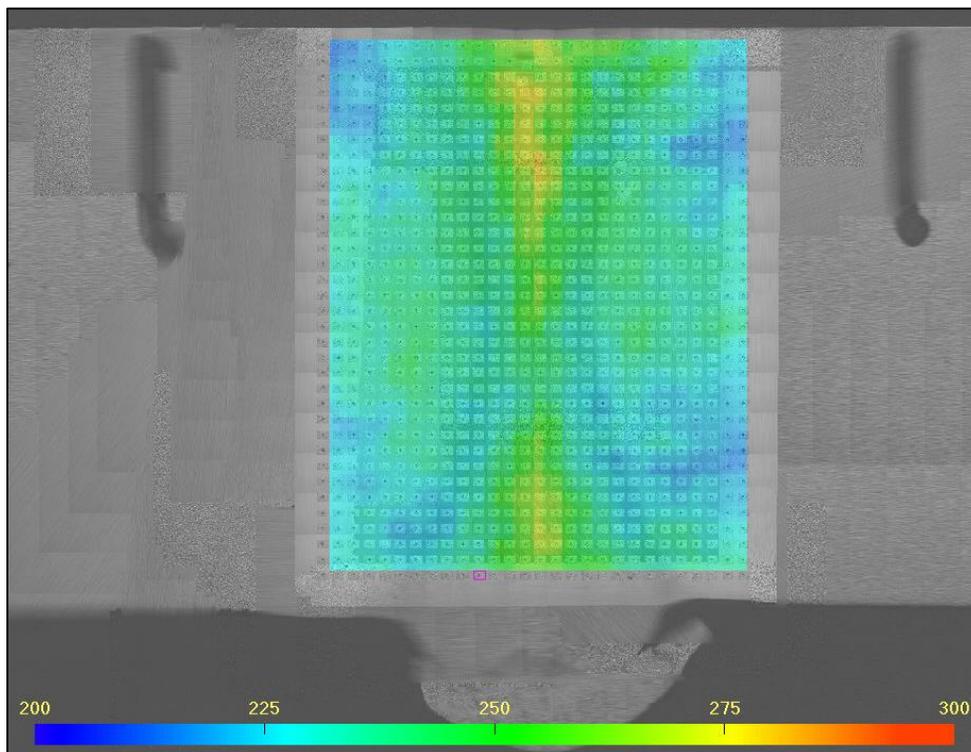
Vickers Hardness Map of the HFRW Tube Weld Joint
